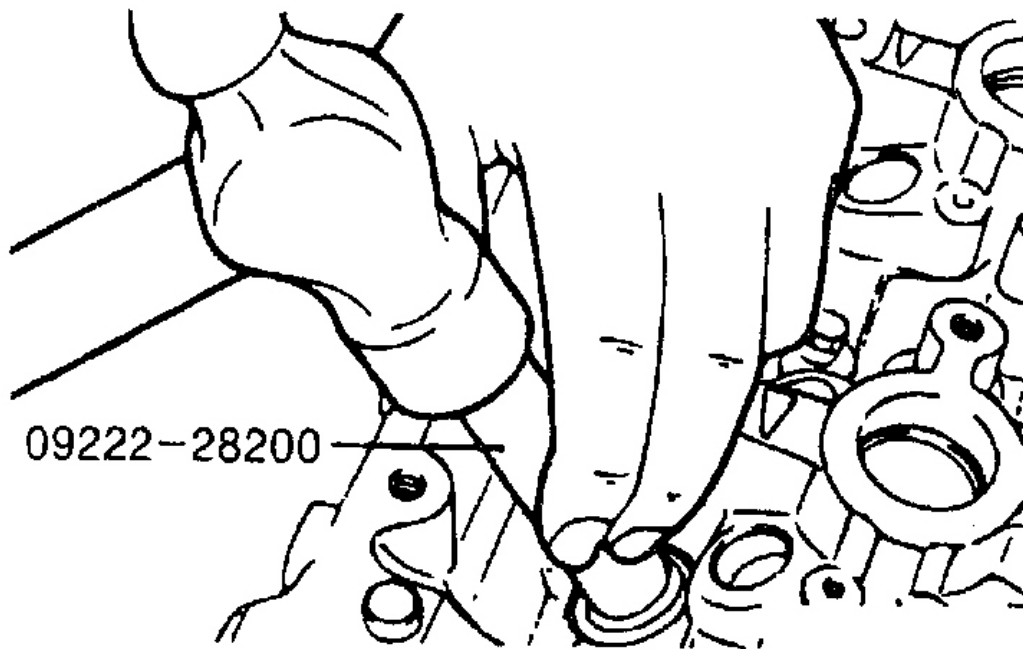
Identifying Valve Spring Sheet, Stem Seal & Special Tool
